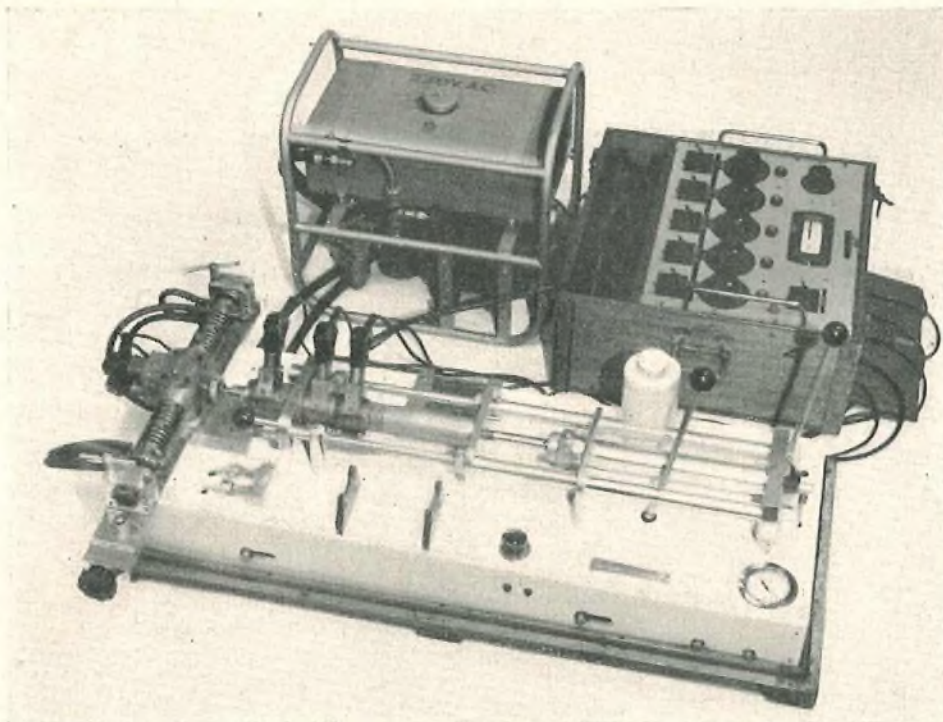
GENERAL VIEW OF ASSEMBLED MOULDING EQUIPMENT
